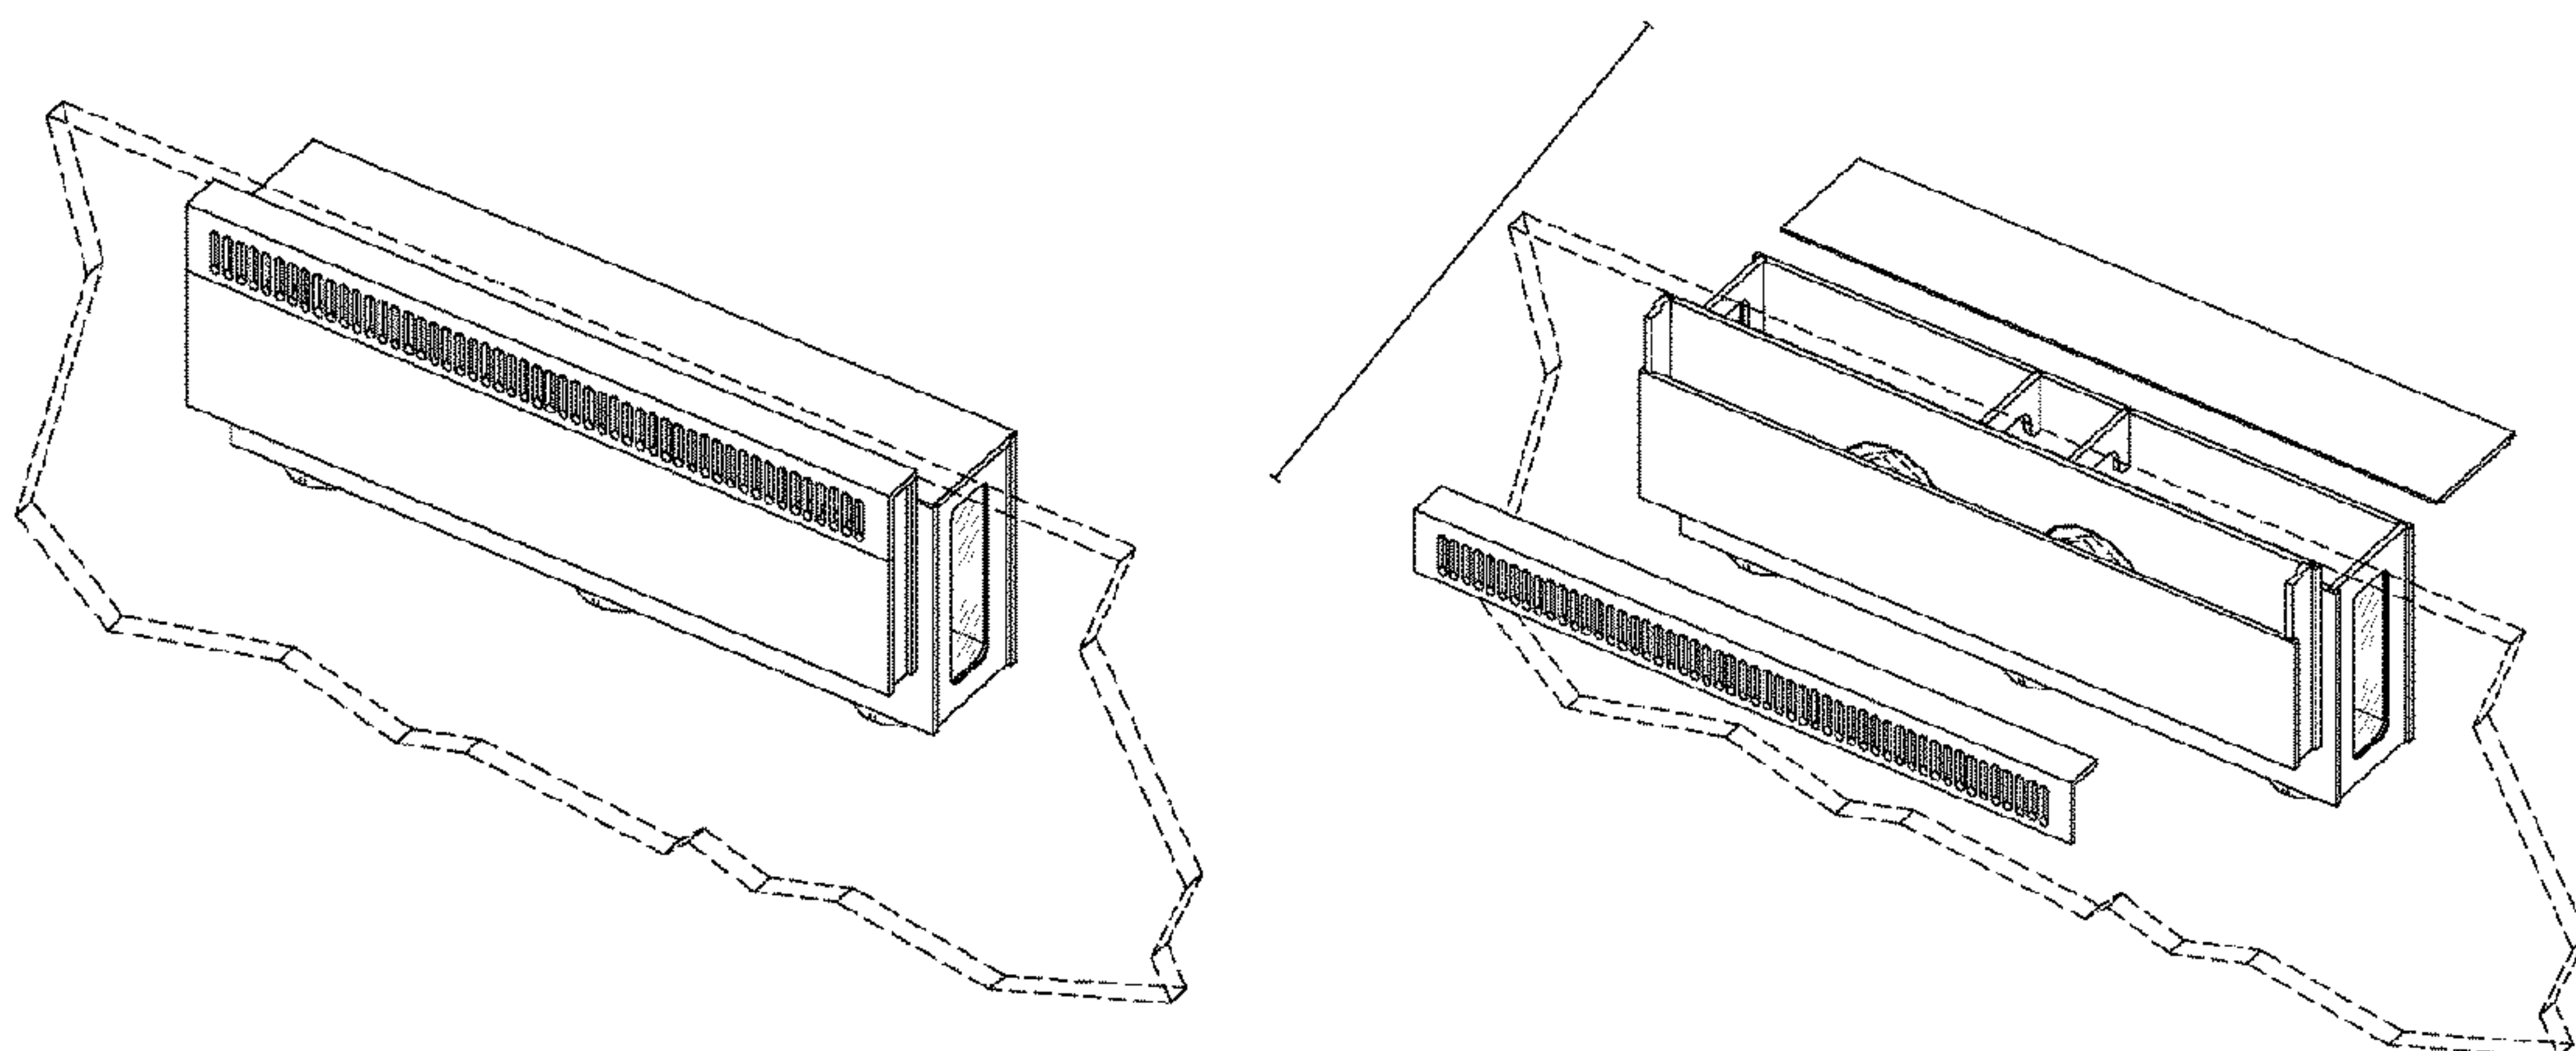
is a perspective view taken along the top left rear thereof showing a cutaway view of the rear face of the external overflow box; and,
